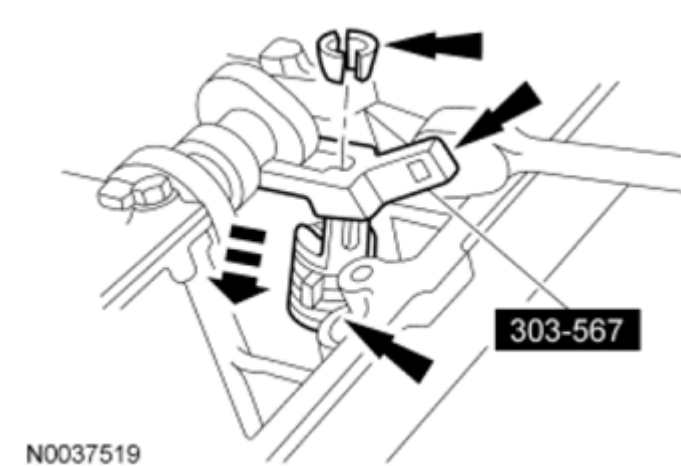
Locating Valve Springs And Valve Spring Retainers
